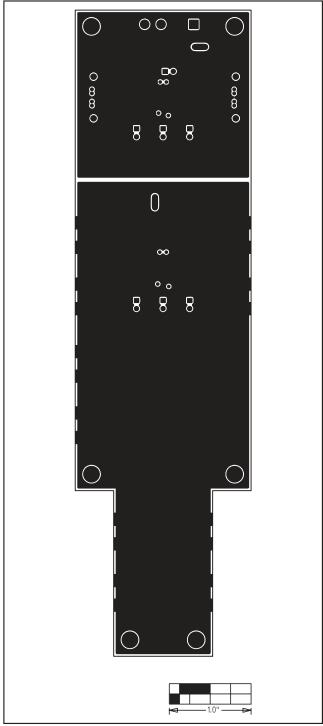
MAX4951 EV Kit PCB Layout—Solder Side
